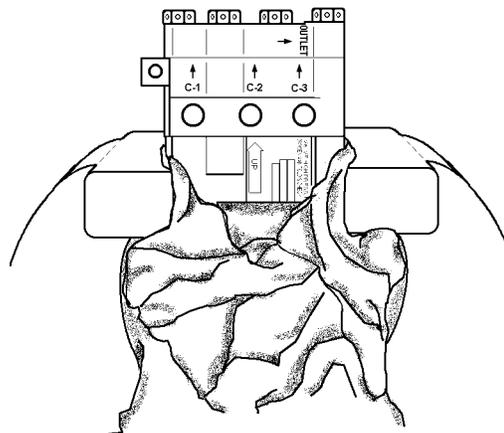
Installing Manifold and Check Valve Assembly in Vise
